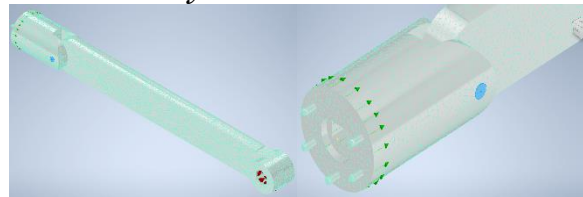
Specified constraints, loads, connections, and generated mesh for sample tool subassembly
